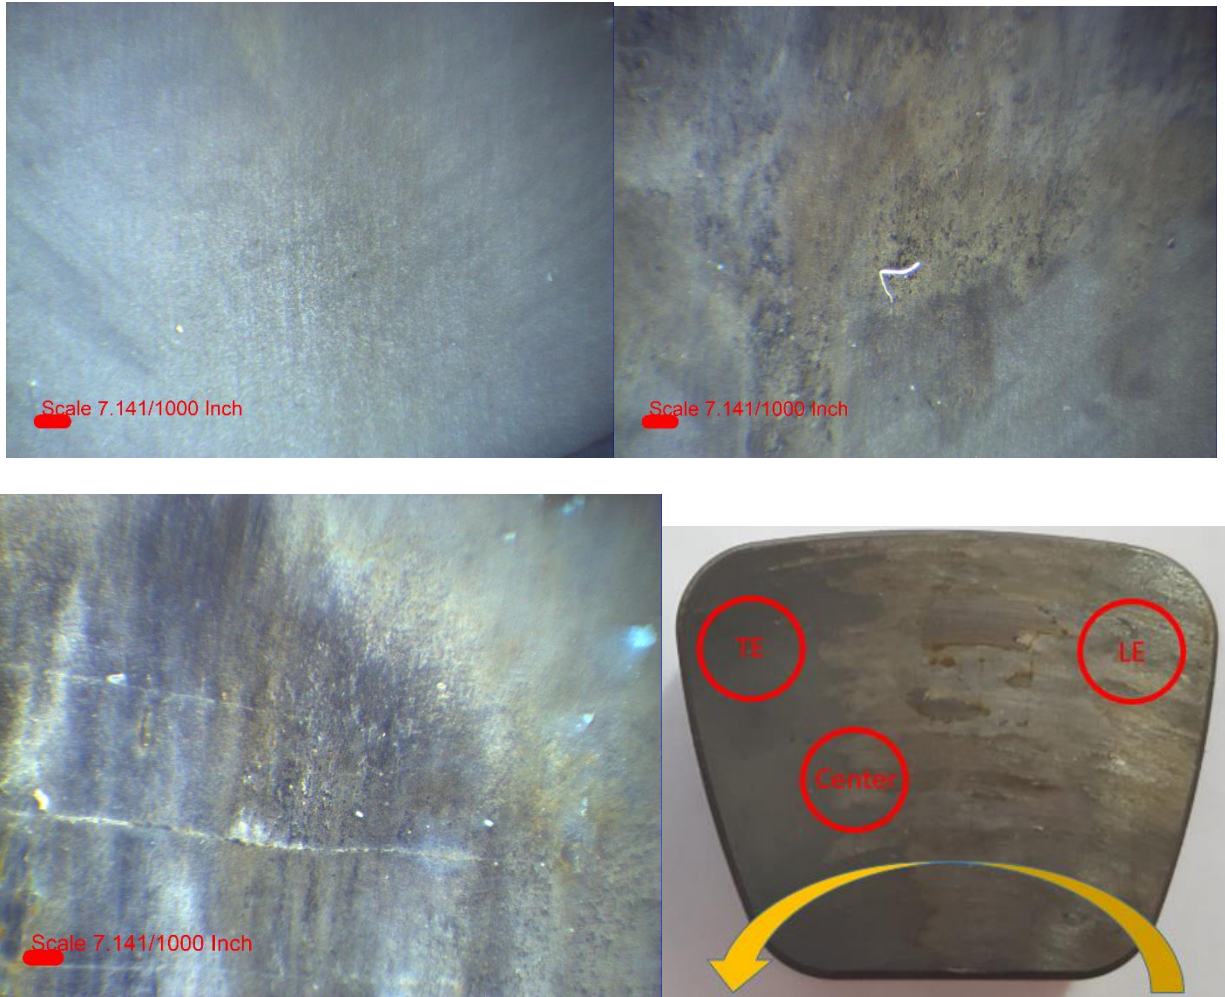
Microscopic views of wear on WC bearing pad 1. Top left: trailing edge. Top right: pad center. Bottom left: leading edge. Bottom right: pad locations with direction of rotation
